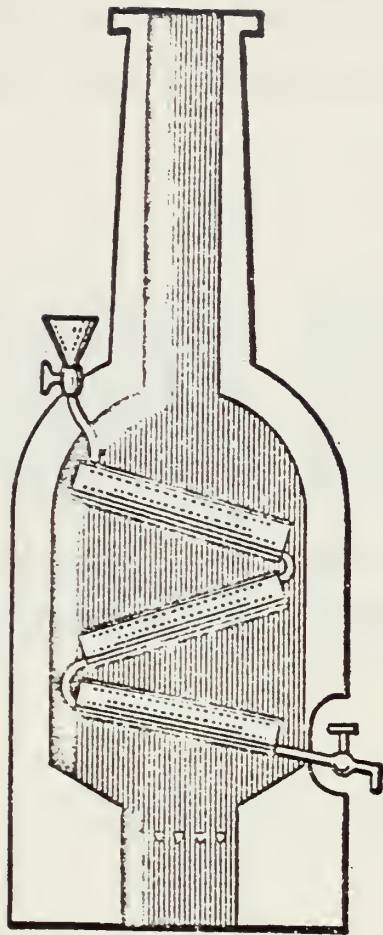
FIRST WATER-TUBE BOILER - 1766
